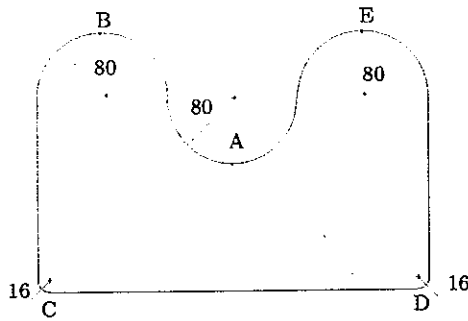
Workpiece for 2-D contour tracking (radius in mm)
